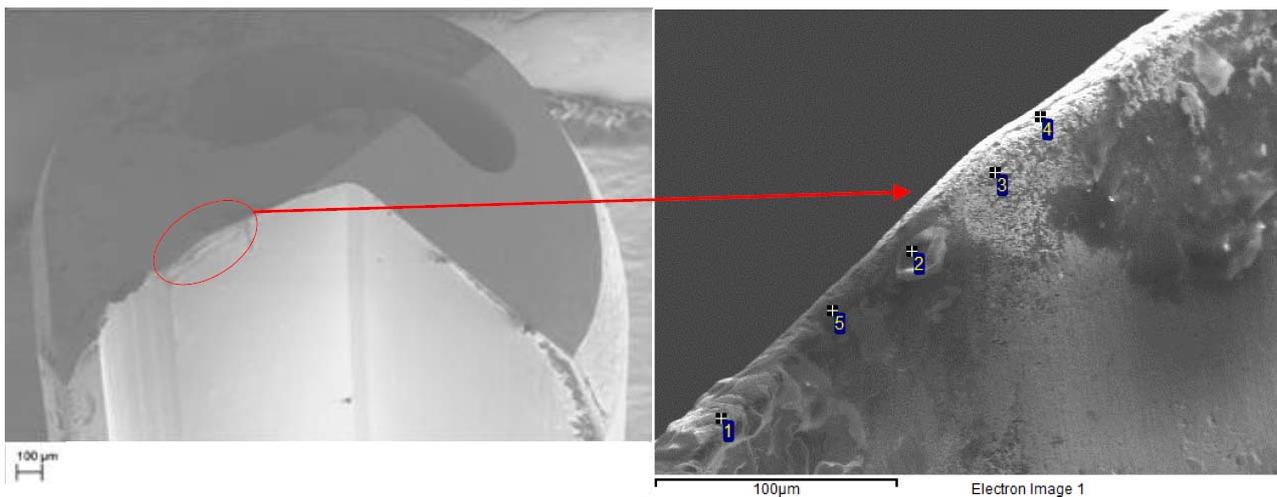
Sharp tool after drilling 50 holes (a), detailed view (b).
